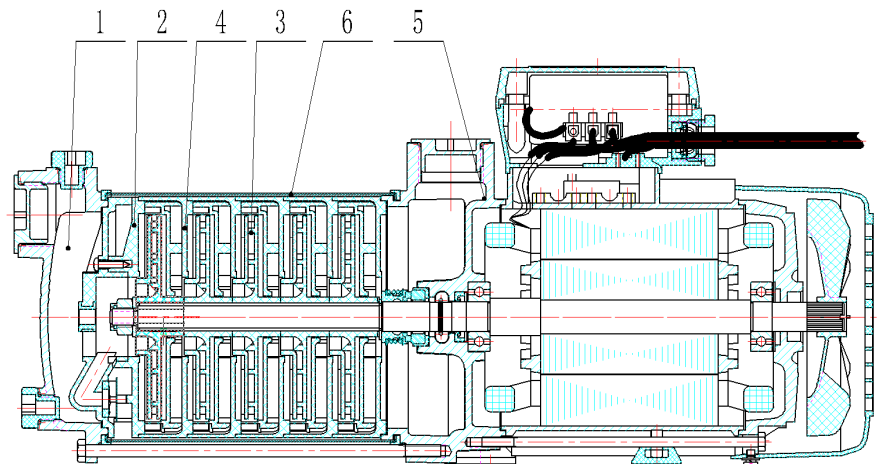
Multi-stage centrifugal pump. 1. Inlet cover 2. Guide vane 3. Impeller 4. Runner guide vane 5. Discharge chamber 6. Cylinder body.
